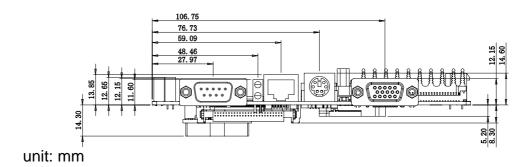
Board Dimension Layout (Coastline Including of LPC Module)
